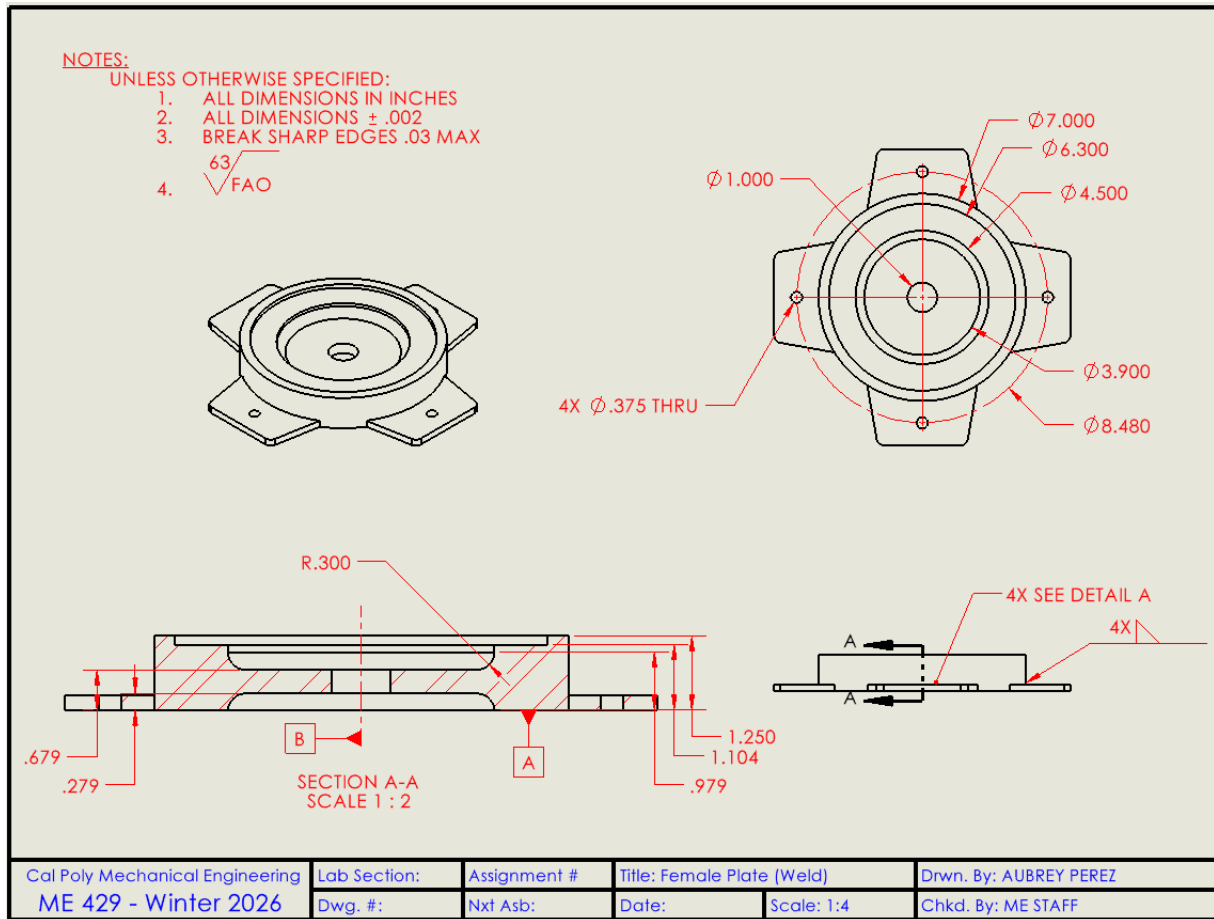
Detailed drawing of Female Plate for assembly 3000
